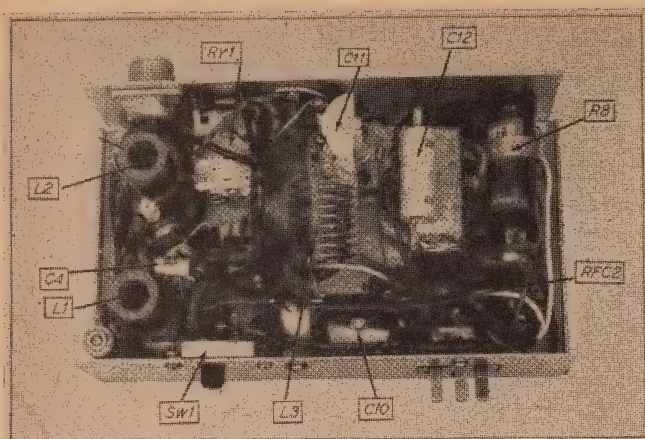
Underchassis view of the 28-28 transmitter showing the placement of some of the major components.
